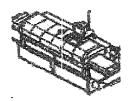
System-Level Reconfiguration for PCB Assembly Line
